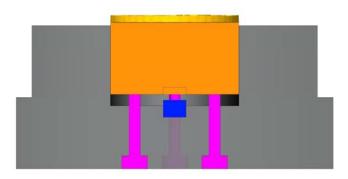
Ejection of Medallion from the Lower Die Assembly
